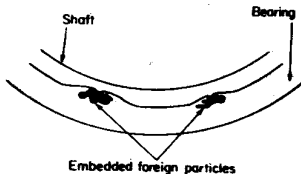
Bearing metal covers foreign material as it embeds in the bearing.
